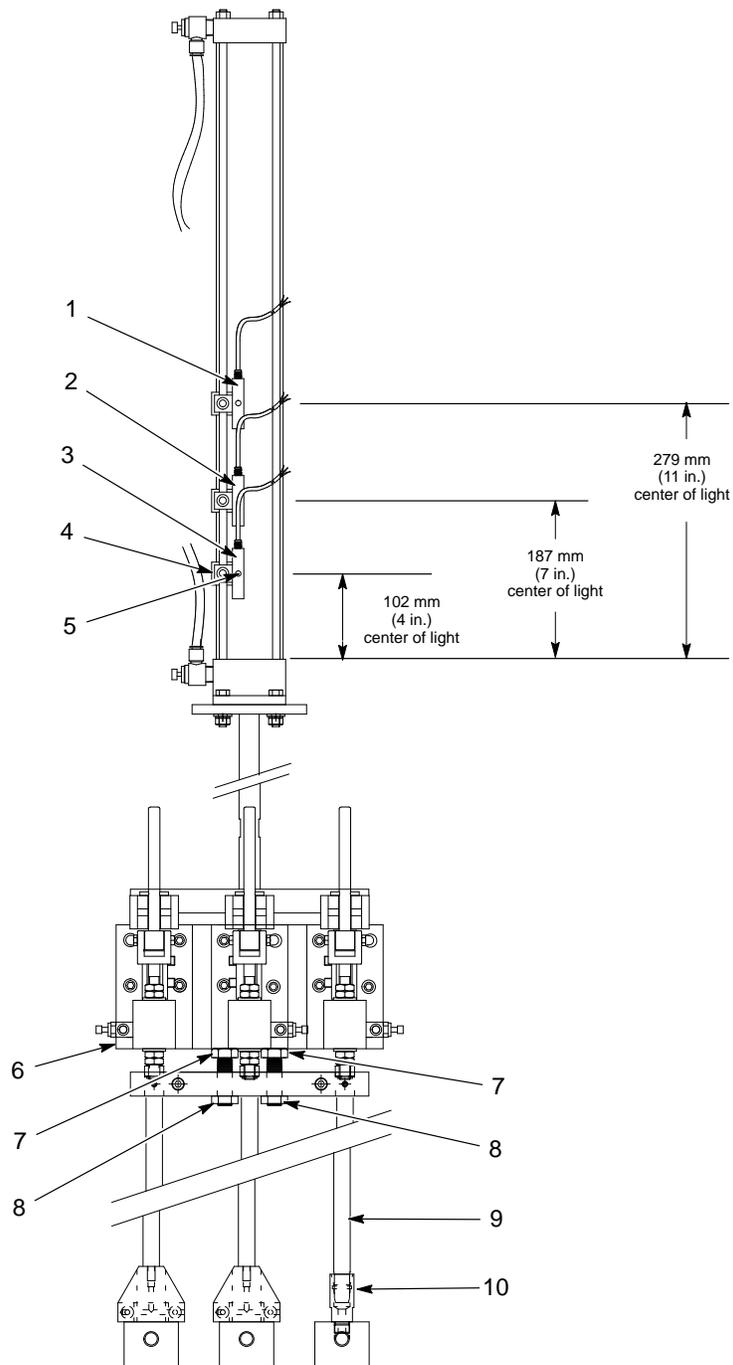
Bottom of Stroke Sensor and Stop Bolt Realignment
